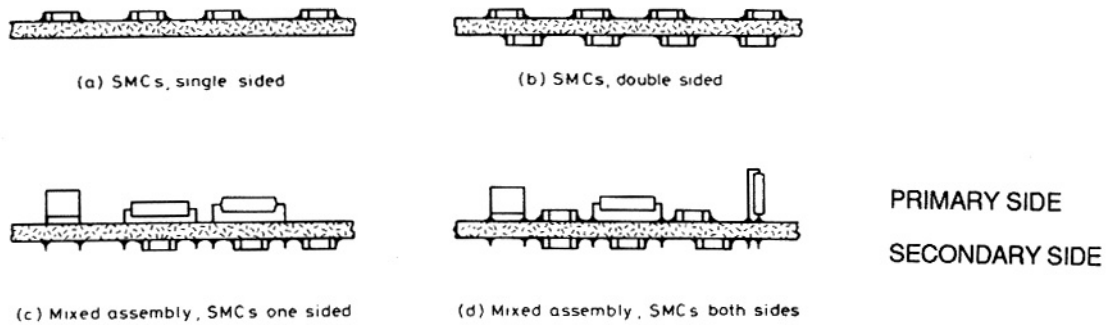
Common types of SMD- and mixed SMD-/hole mount PCBs.
